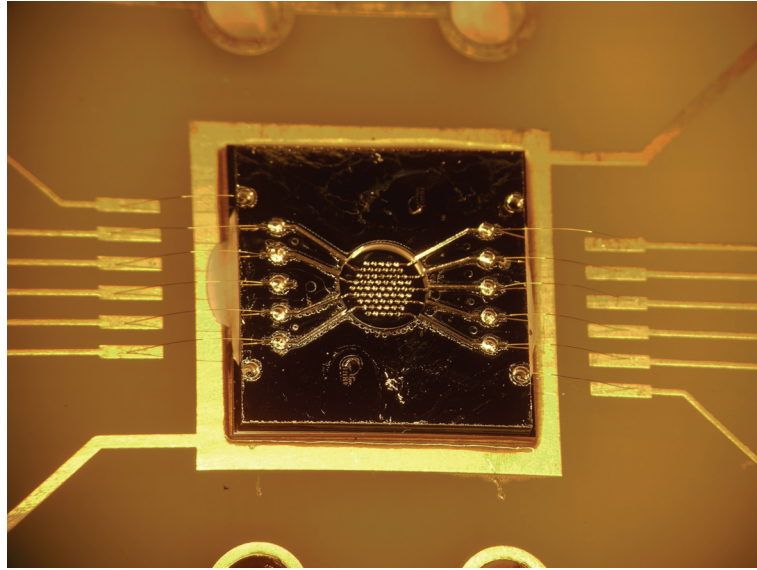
Photograph of a fully assembled thruster with individually addressable extractor electrodes. Contact between the printed circuit board and the extractor electrode is done through a gold bond wires.
